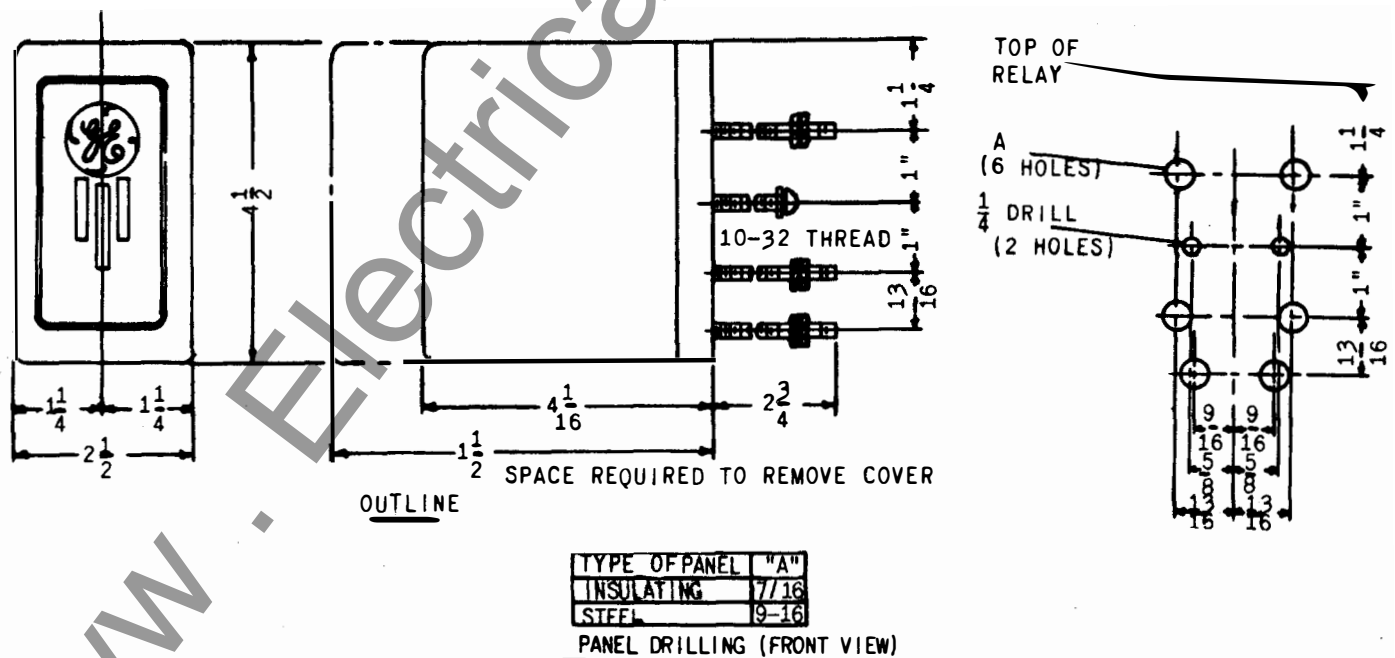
Outline And Panel Drilling For Surface Mounting Of HGA17F Relay
